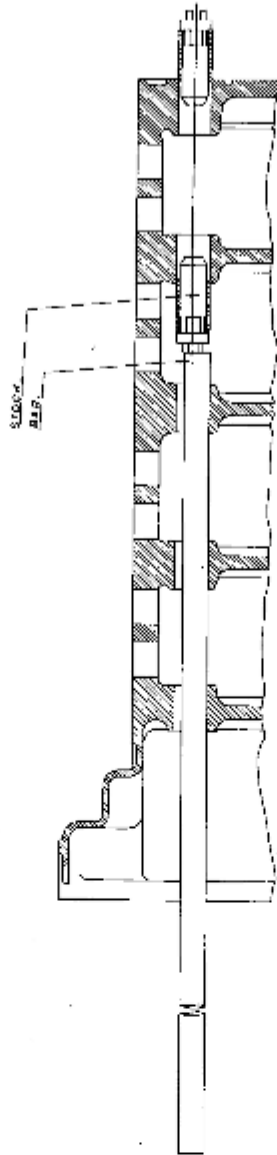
CAMSHAFT BUSH EXTRACTING AND INSERTING STOCK AND BAR.
